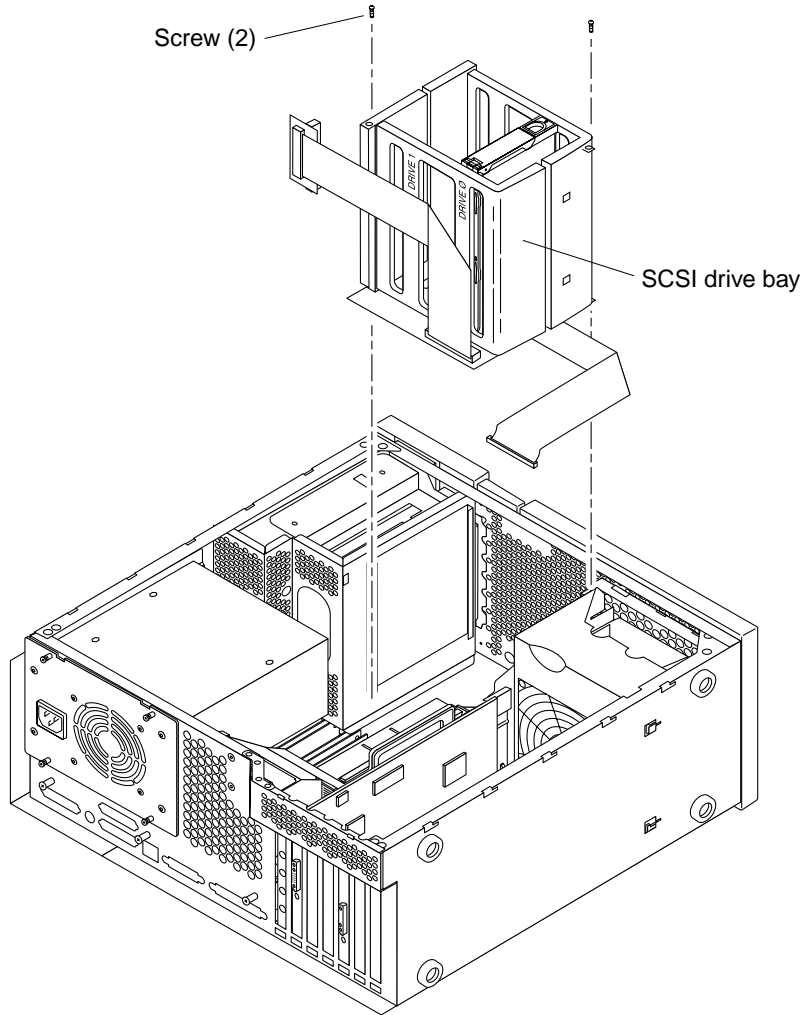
Removing and Replacing the SCSI Drive Bay
